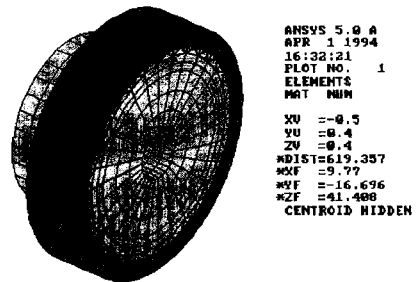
Three dimensional finite element mesh of casting roll without fine crack model
